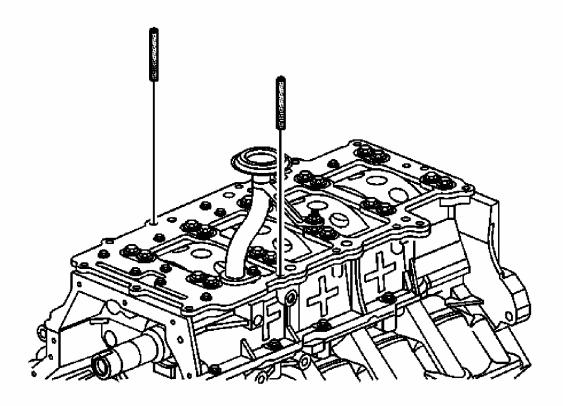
Identifying EN 46109 Guide Pins Courtesy of GENERAL MOTORS CORP.
